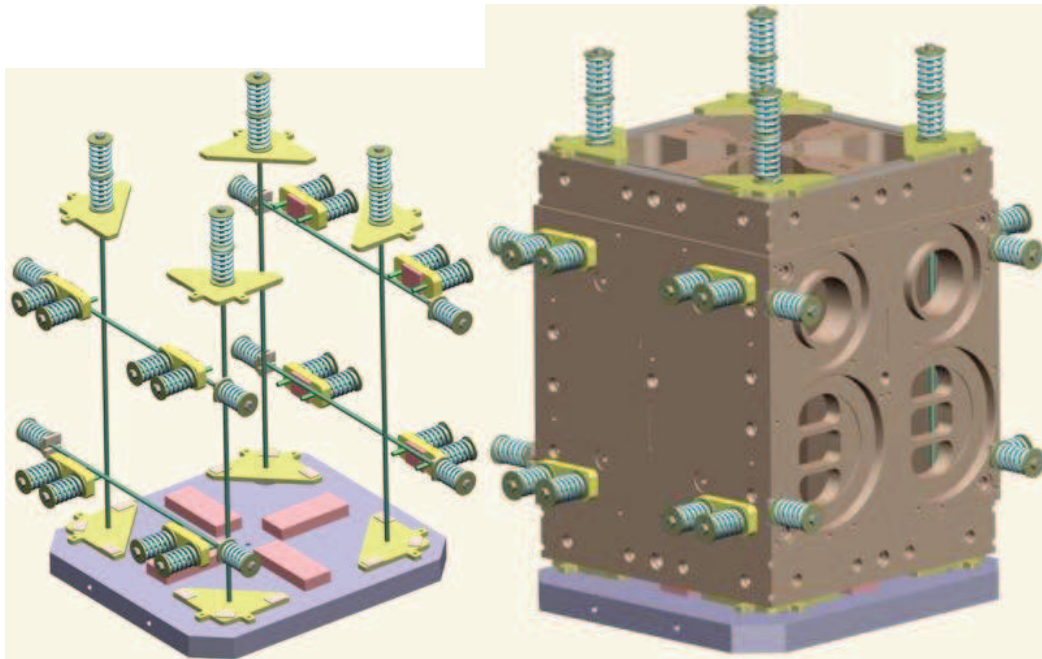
CAD models of the brazing tooling (left) and the brazing assembly (right)
